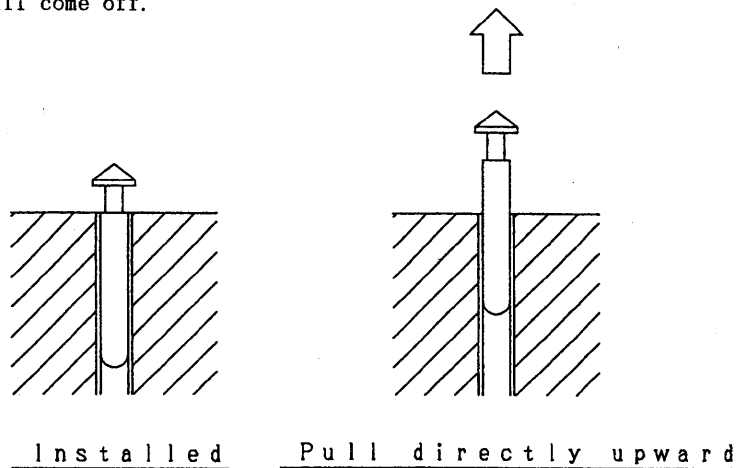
Replacement of electrical contacts of the Tooling Adaptor
